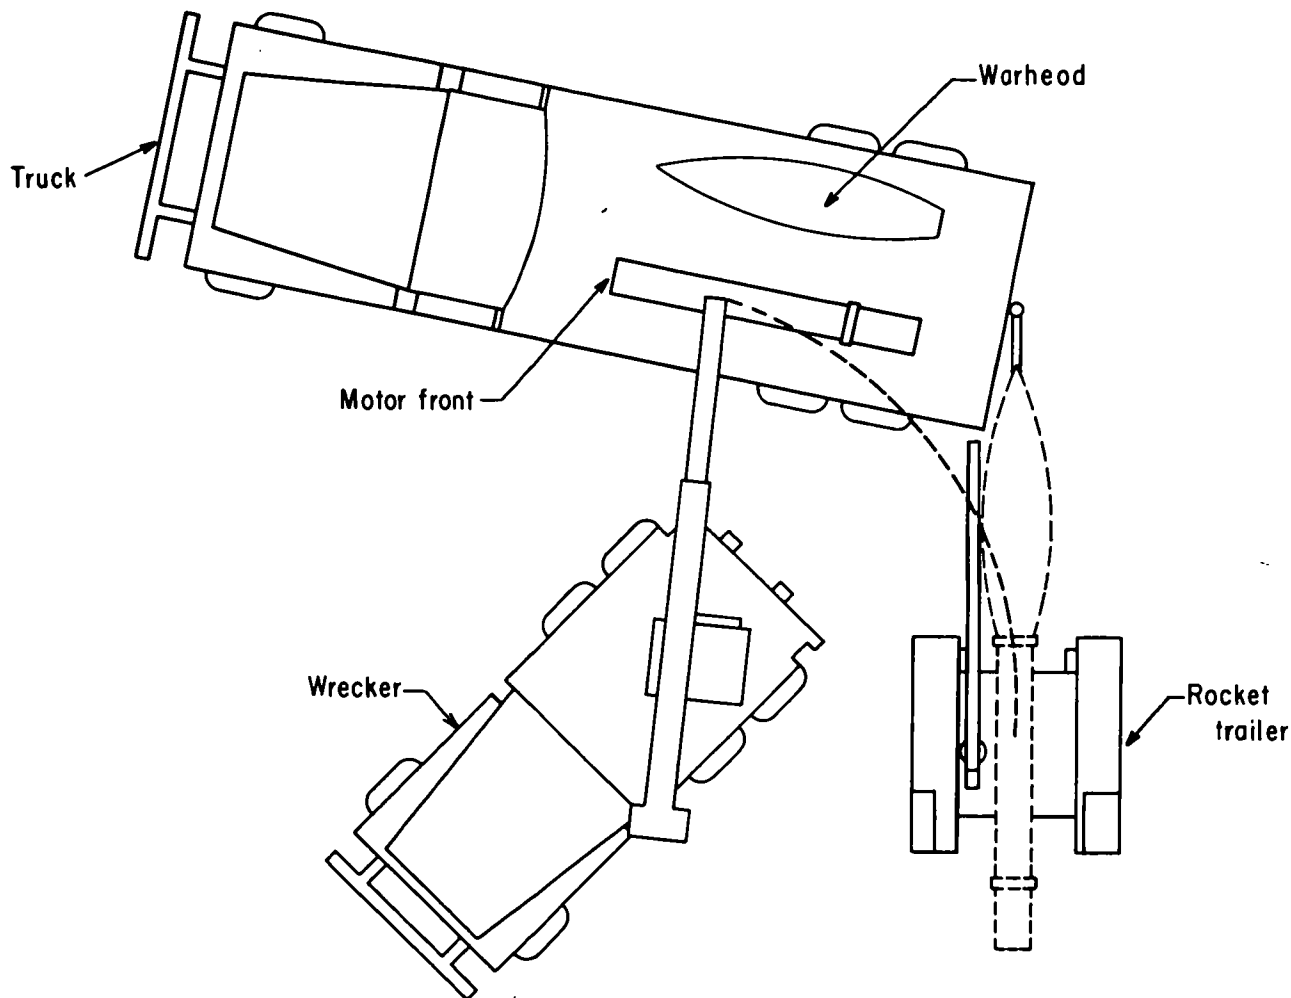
Positions of vehicles for rocket assembly with the wrecker.
